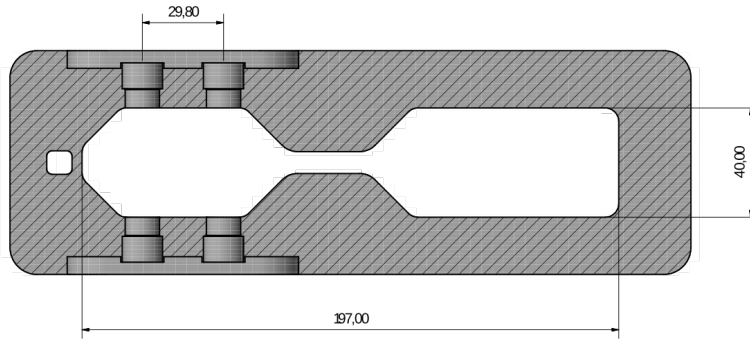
Cross section of typical BPM electrode inlets in a vacuum chamber used at DELTA. Source: adapted from technical drawing [35].
